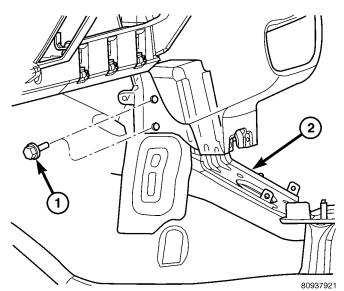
INSTRUMENT PANEL CENTER SUPPORT RETAINING BOLTS
